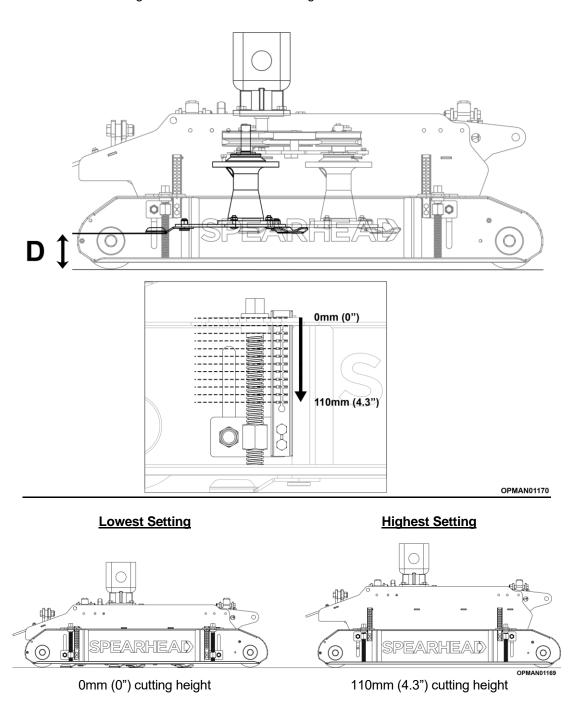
Rollicut Roller Cutting Height Adjustment
